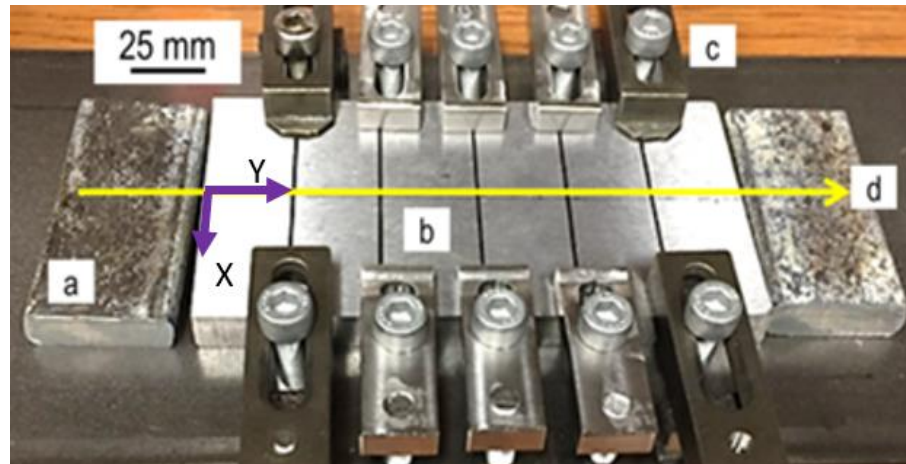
Experimental setup. (a) Dummy piece, (b) Weld specimens, (c) Clamp, and (d) Weld direction.
